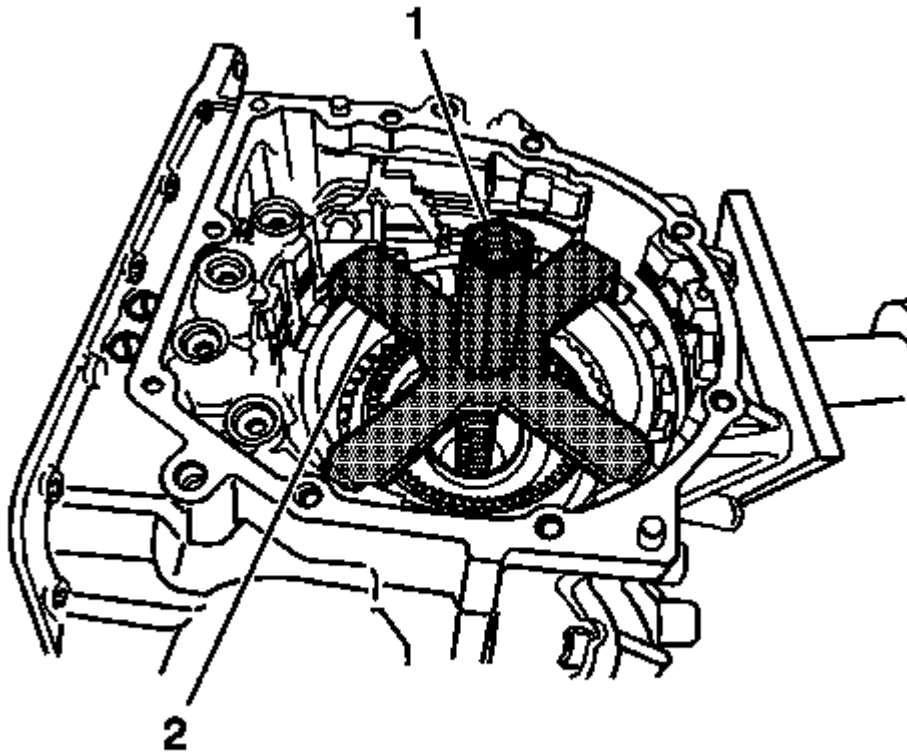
DT 46455, DT 46457, Snap Ring Of 1st & Reverse Brake
